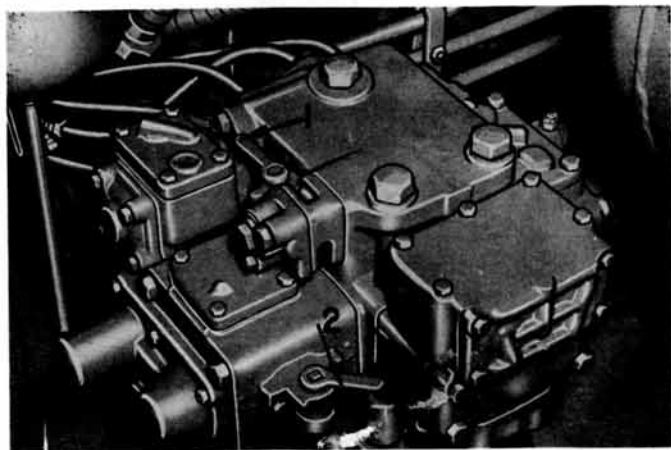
D-24 CONTROL VALVE "A" UNIT
